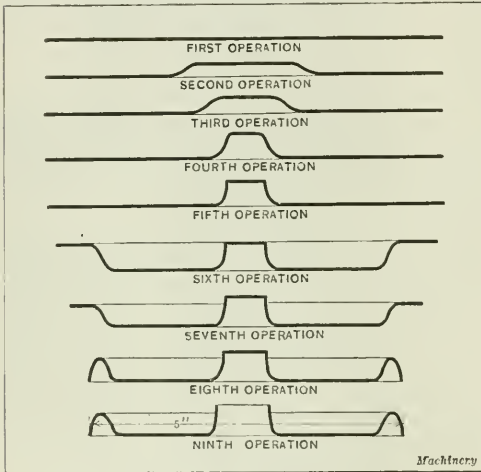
Successive Steps in producing Half of a Pressed-steel Caster Wheel
